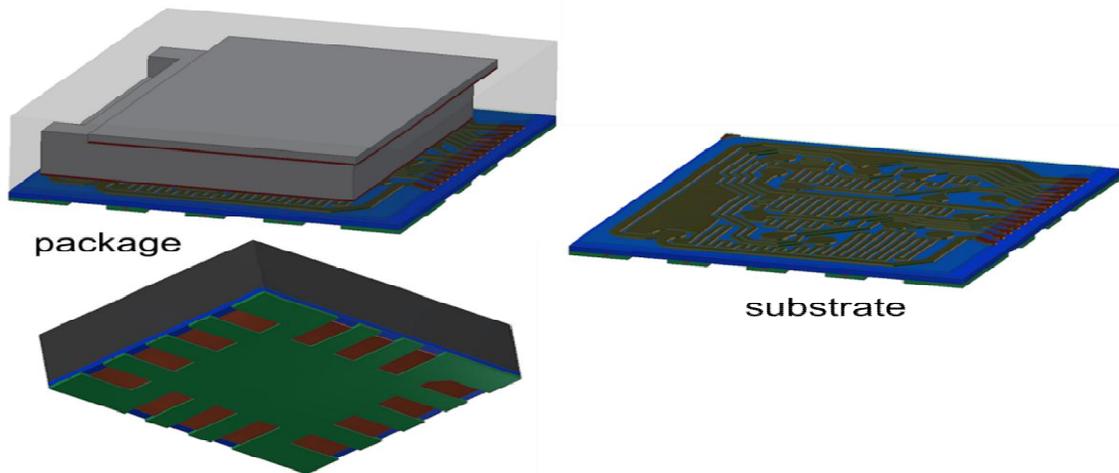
3D CAD model of the semiconductor package with details of the metal traces and solder mask included
